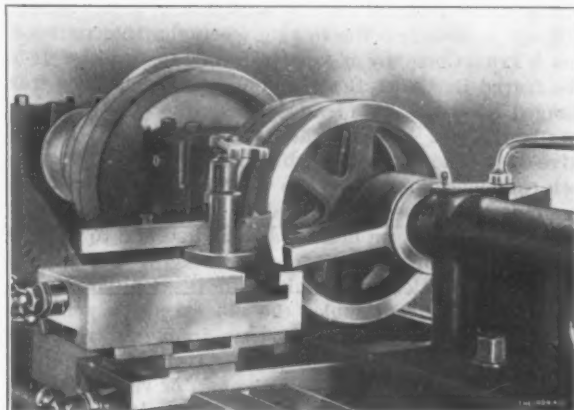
Showing Step Gauge Used in Setting Tool to Diameters.
